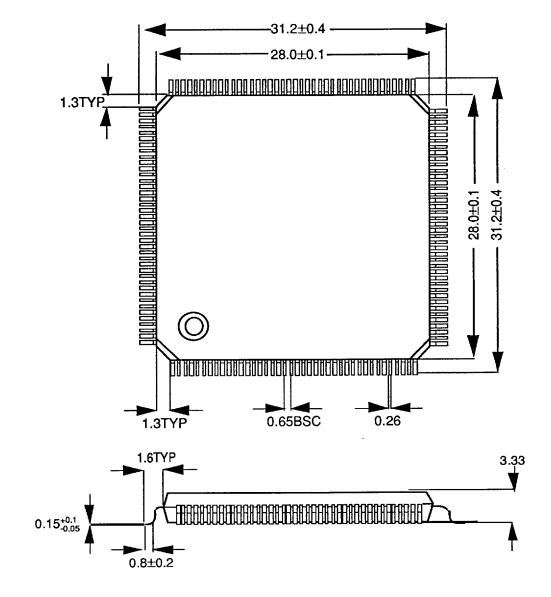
TVGA8900D Packaging PFP 160 Pins (dimensions in mm)
